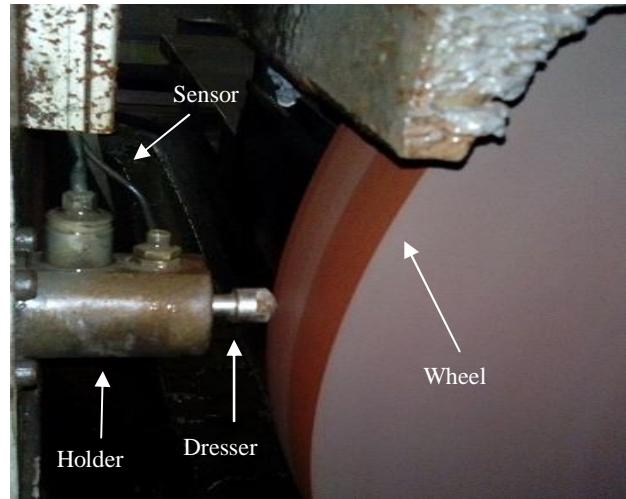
Conffliction of dressers tool with wheel in dressing process
